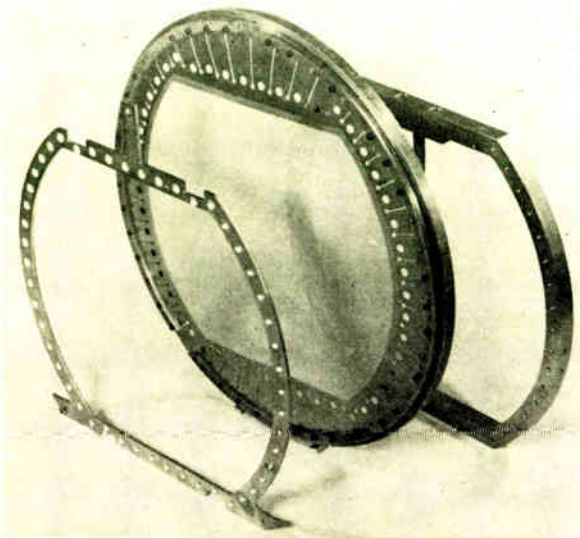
Screen that has been stretched and is ready for clamping between the mounting frame and ring.
